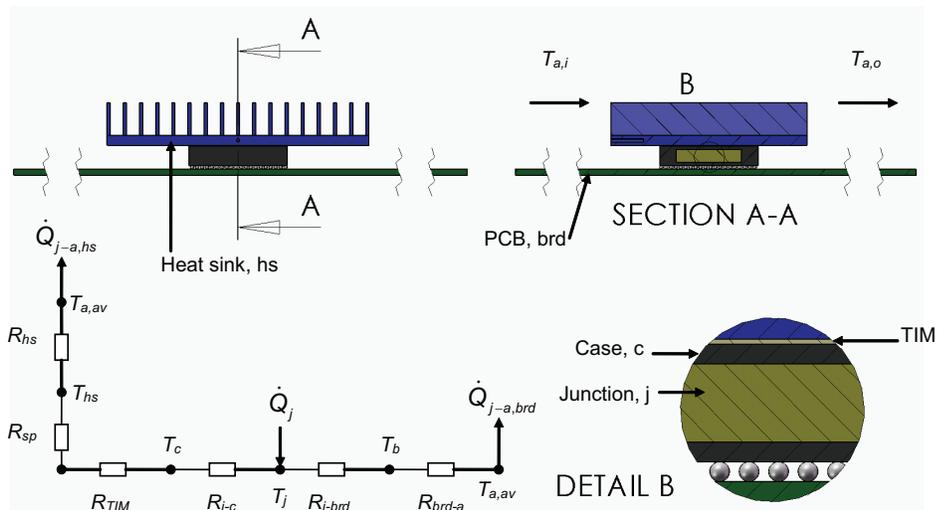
Heat Sink Applied to a Component, Mounted on a Board.
